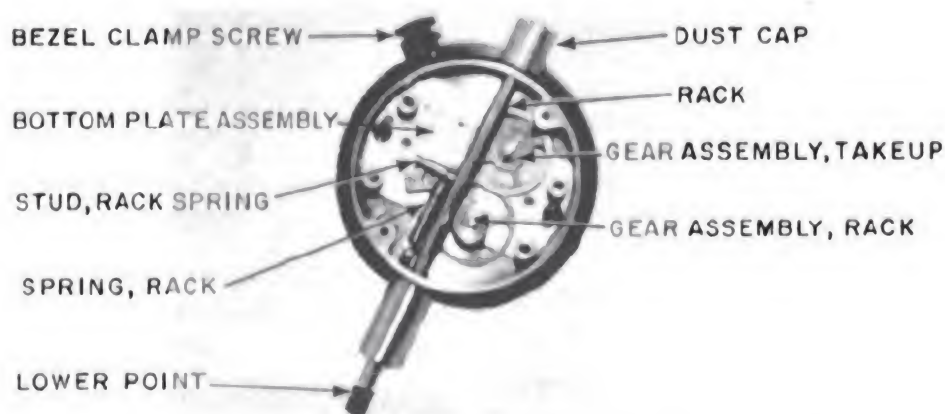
Mechanisms of a Federal dial indicator in the case (back and top plate removed).
